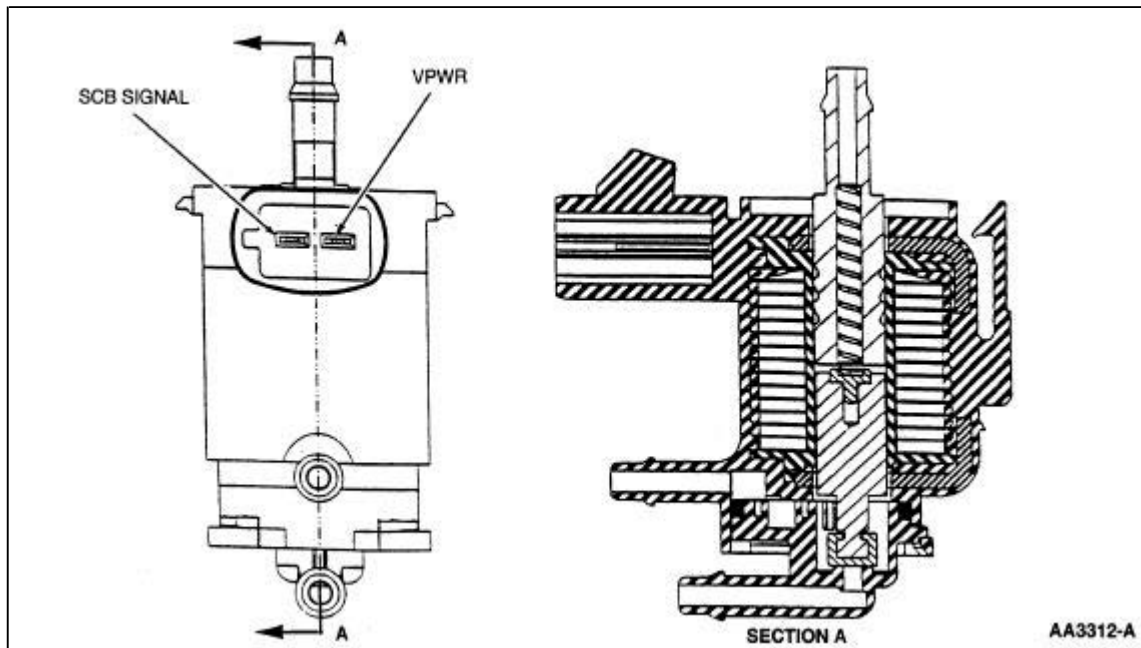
Supercharger (Boost) Bypass Solenoid (Thermactor Air Control Solenoid/Valve Assembly)
